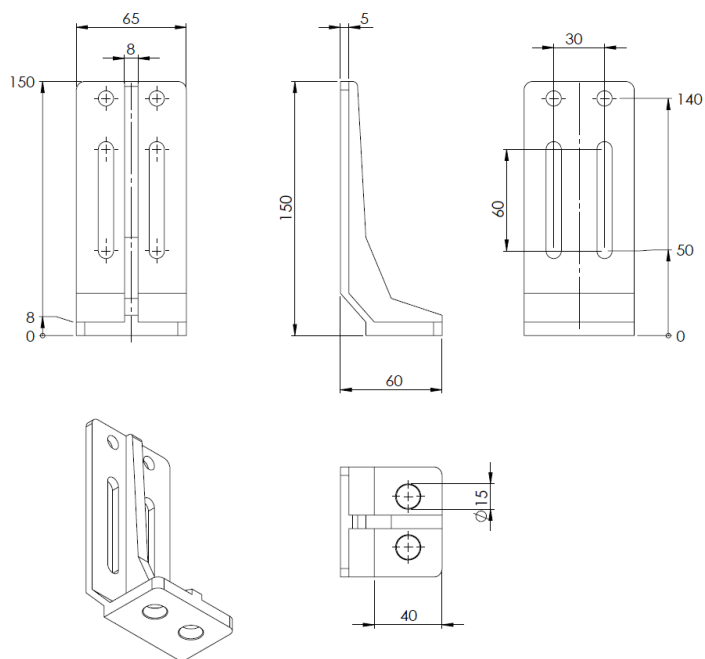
Corner brackets for machine flange – vertical mounting
